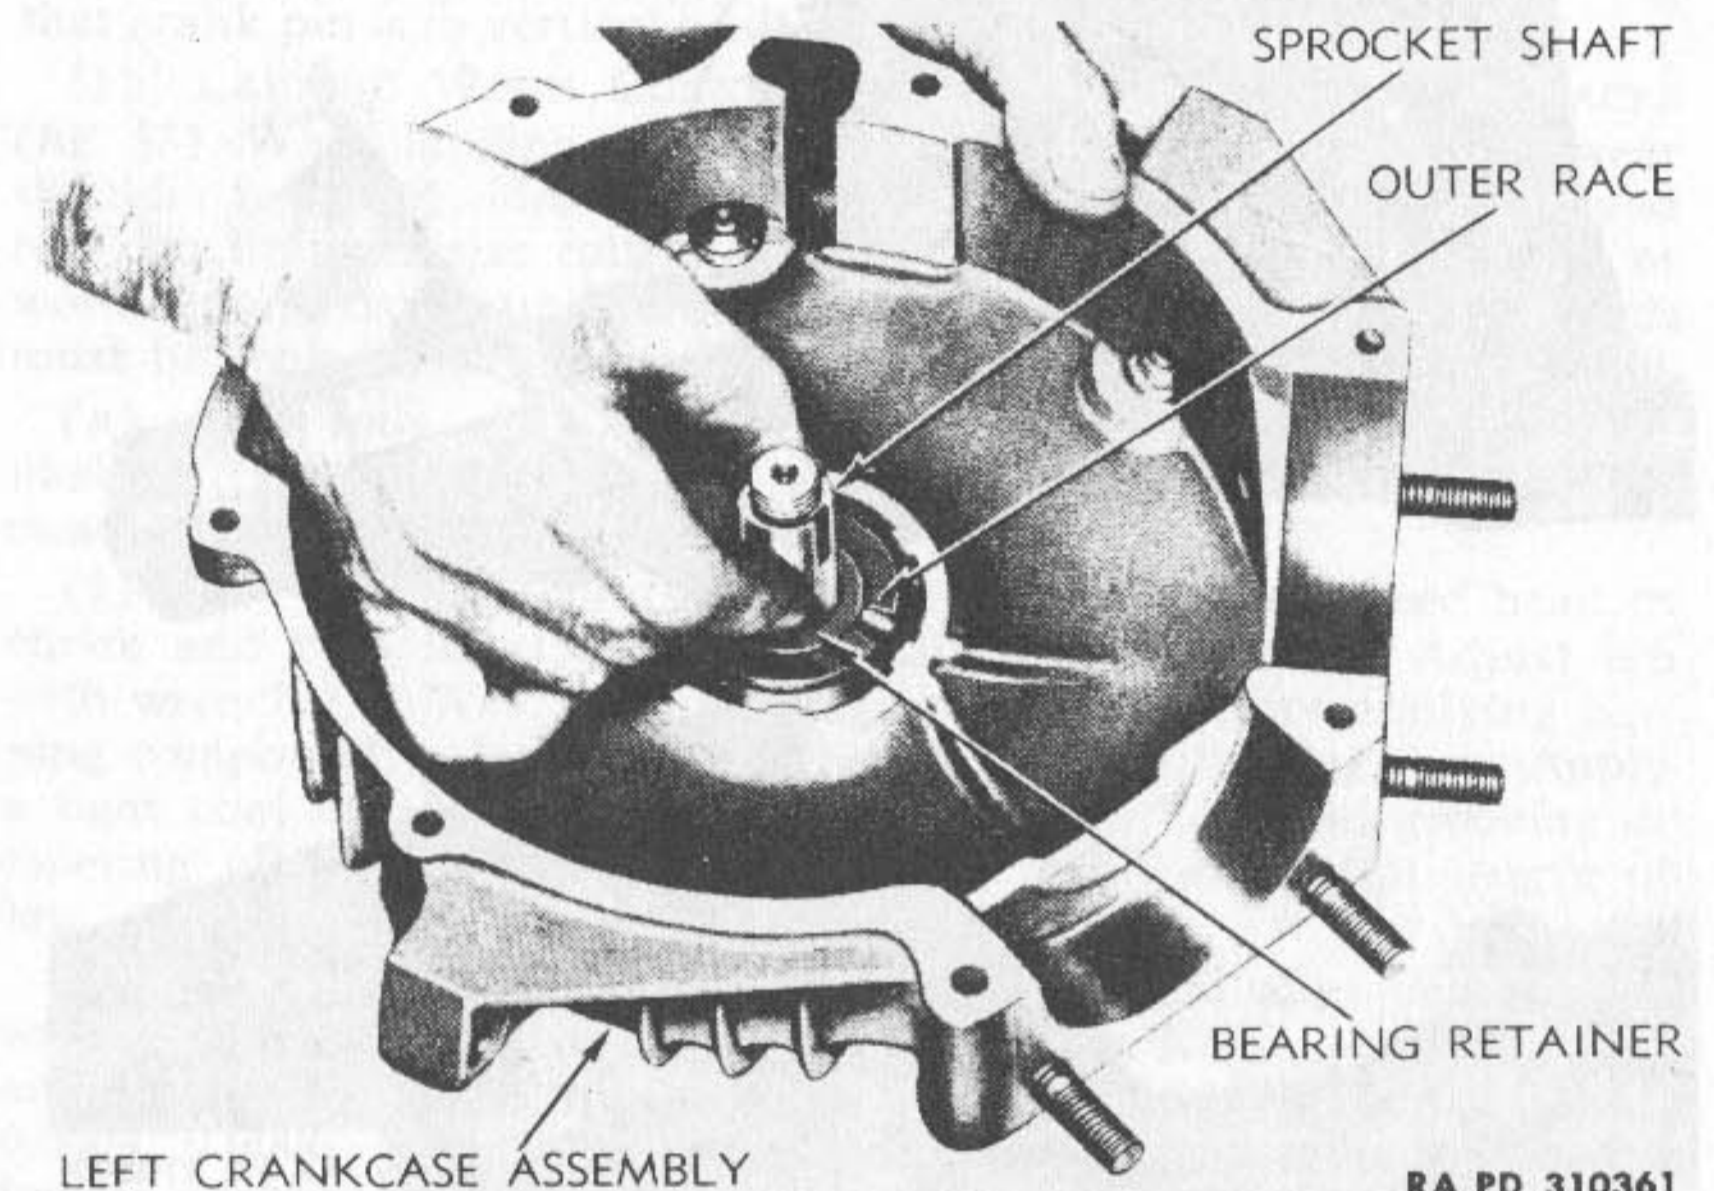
Using Gear Shaft as Size Plug to Determine Bearing Fit
